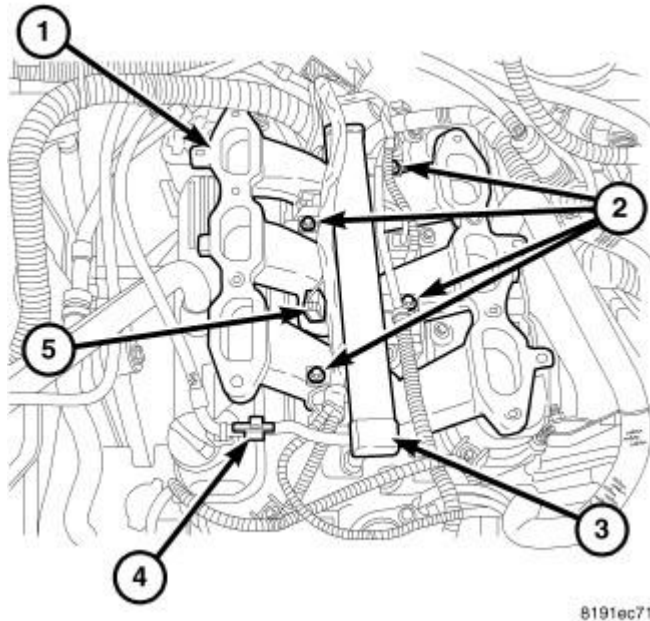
Fuel Injectors, Line, Rail & Fasteners 3.8L
